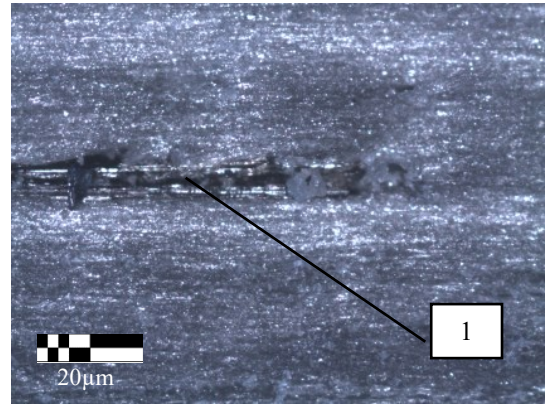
Cut through and grinded sample; (1) embedded material shown
